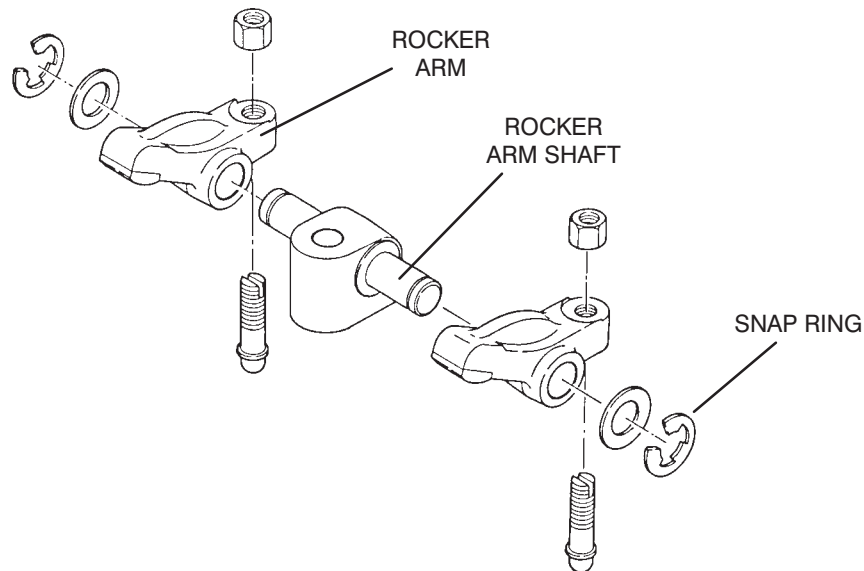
VALVE ROCKER ARM ASSEMBLY
